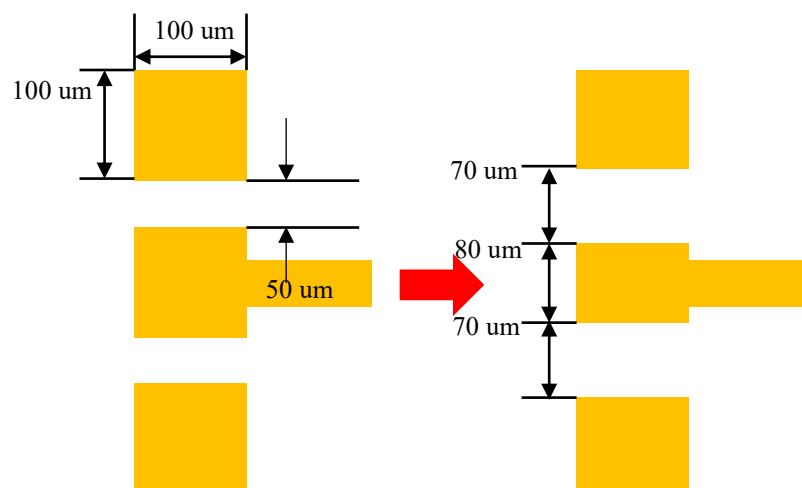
GSG pads on PCB with reduced widths and increased spaces.
